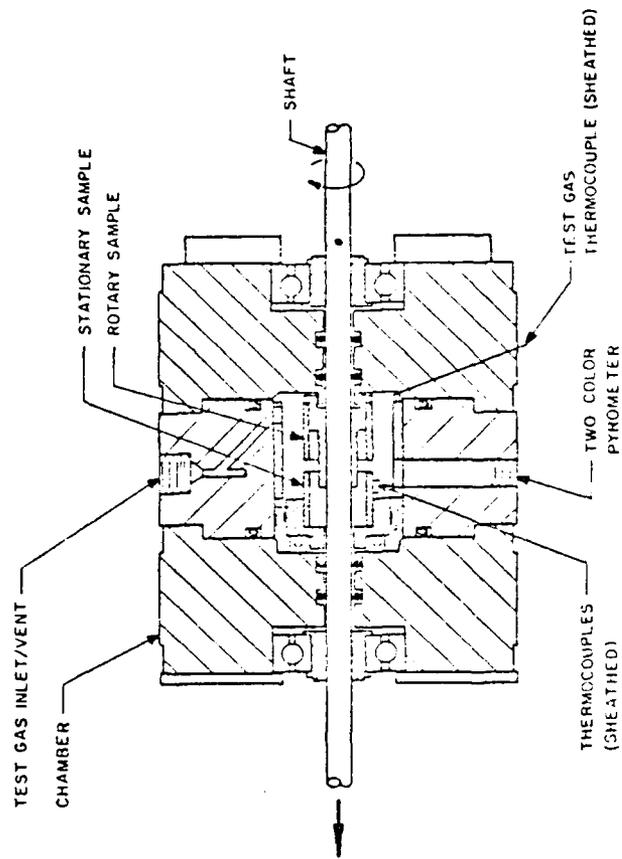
Chamber Exploded View Taken from [Ref. 15].
